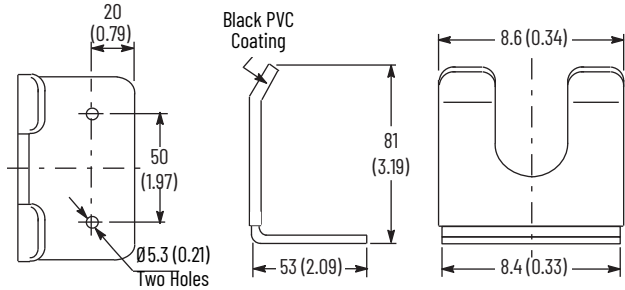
Double Actuator Plate (Cat. No. 440J-A03N) [mm (in.)]
